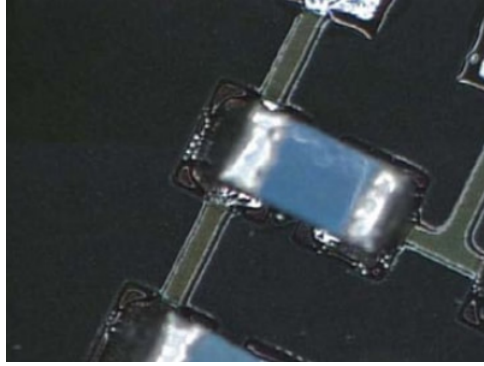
Solder ball issues caused by excessive heating in Reflow Oven. [10]
